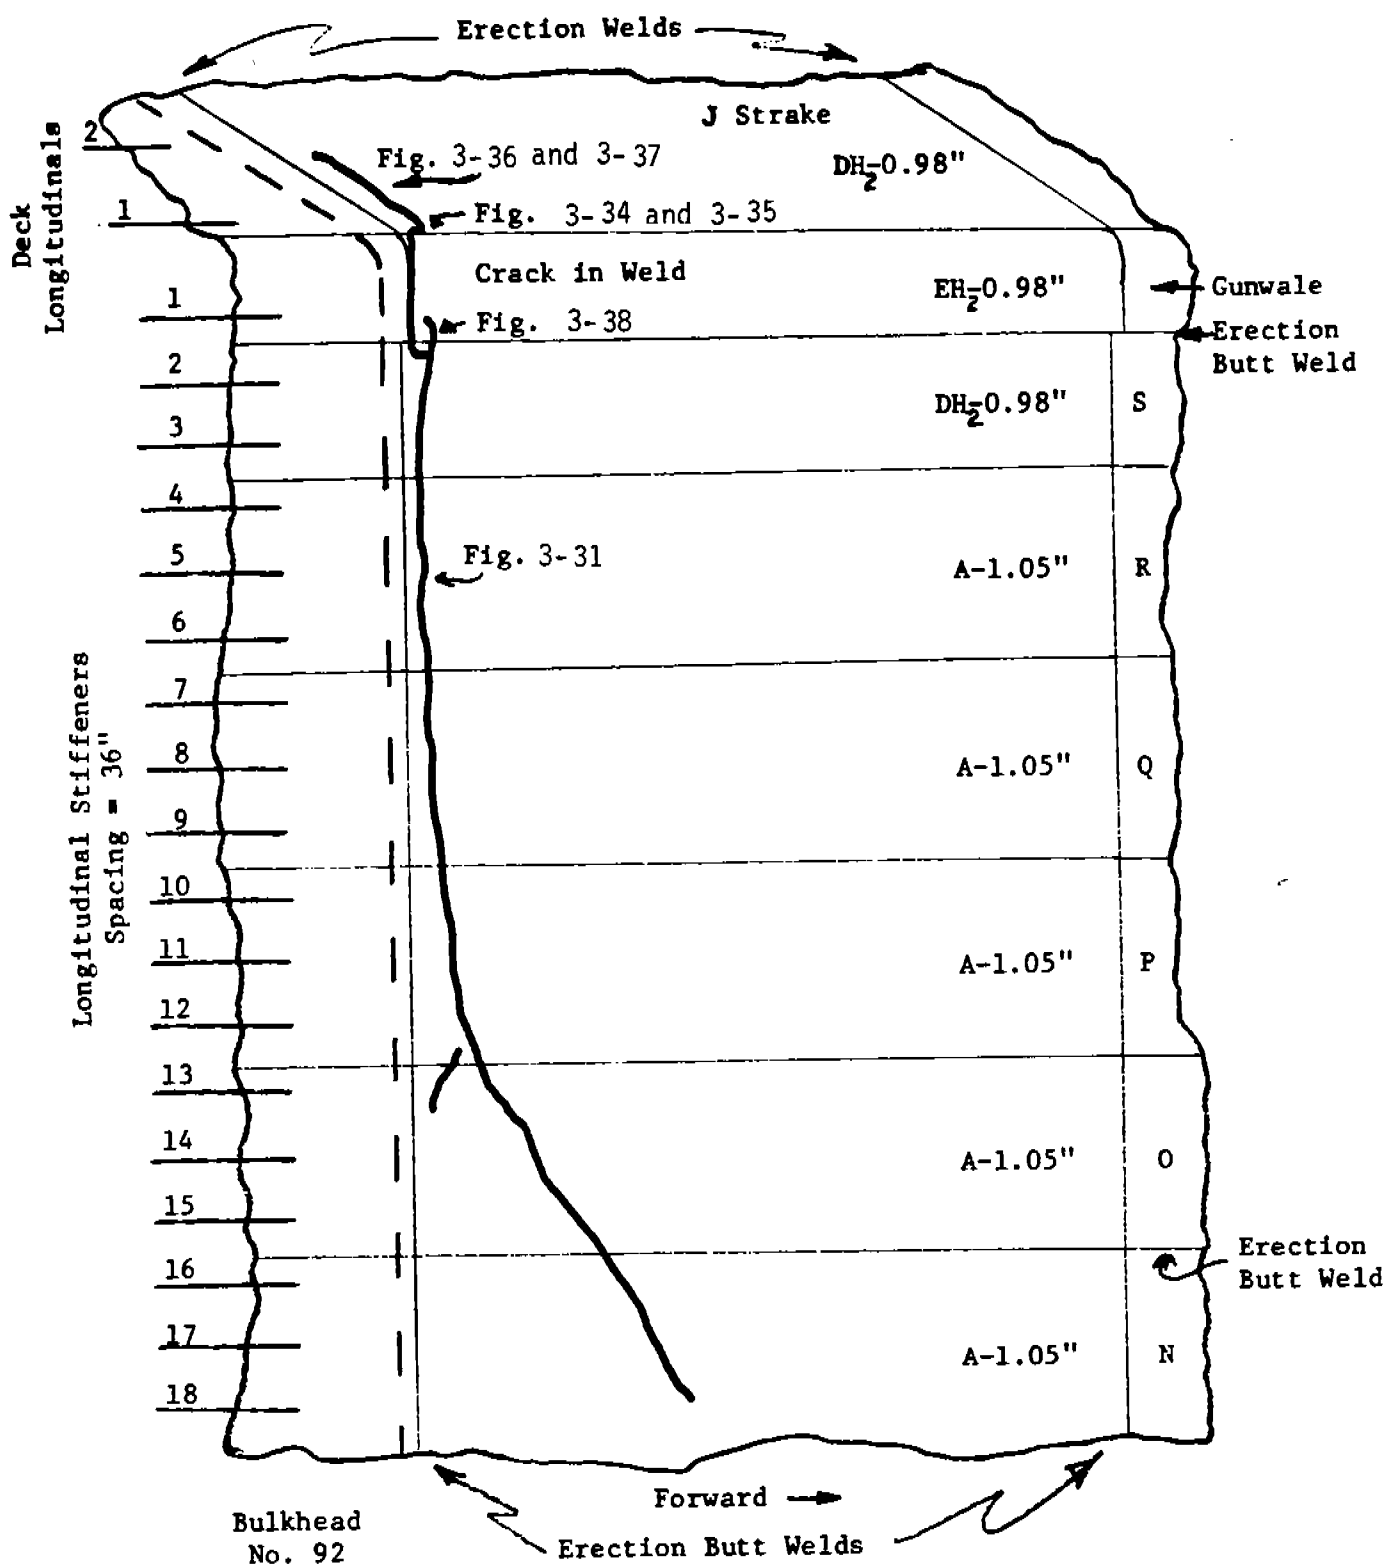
General View of Shell Fracture No. 3 Wing Tank Starboard
